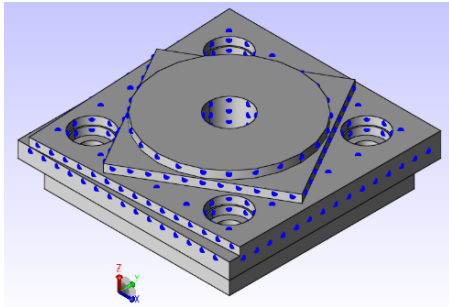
Measurement point of workpiece ISO 10791-7, M1\_160
